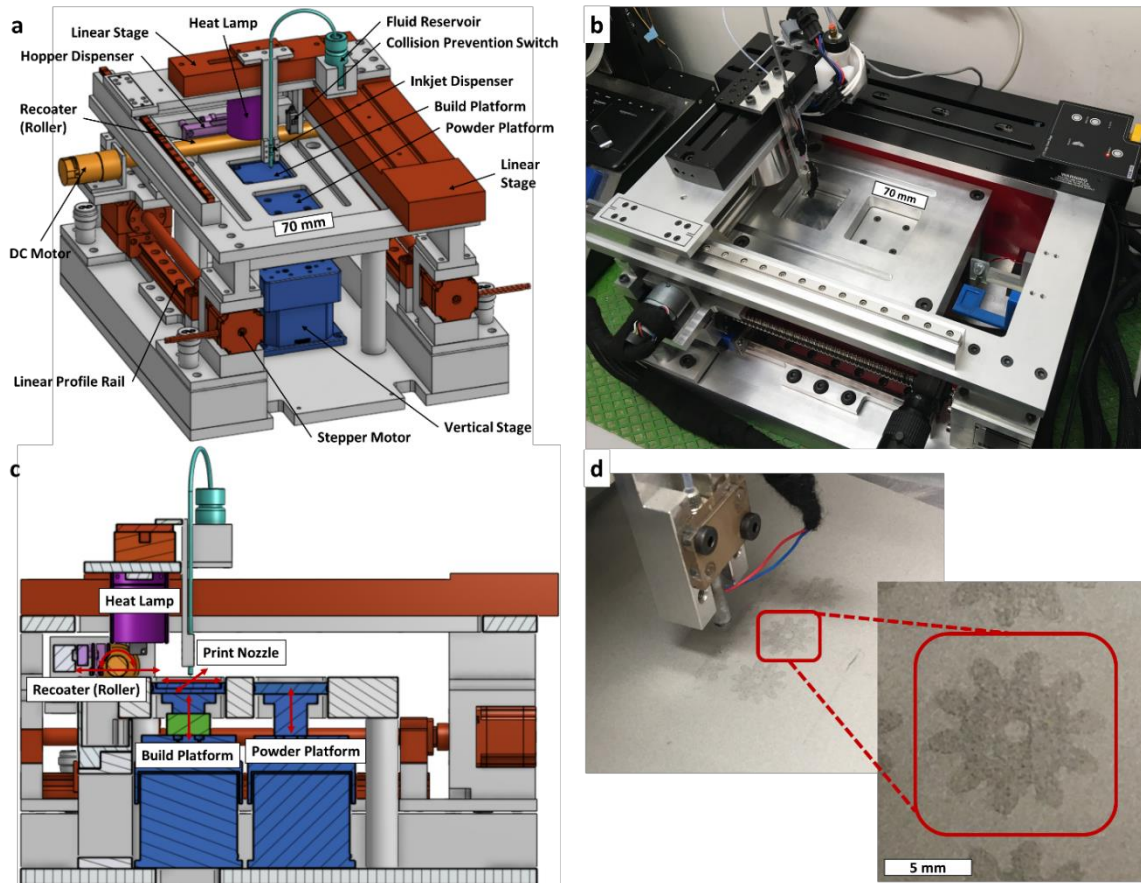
Binder jetting testbed: (a) CAD model showcasing major components with roller installed as the powder spreading tool; (b) fabricated binder jetting testbed; (c) sectional side-view highlighting moving components and trajectories; (d) images from binder jetting experiment using stainless steel 316L 15-45 μm powder and polymer binder, printing an array of gear geometries on the build platform.
